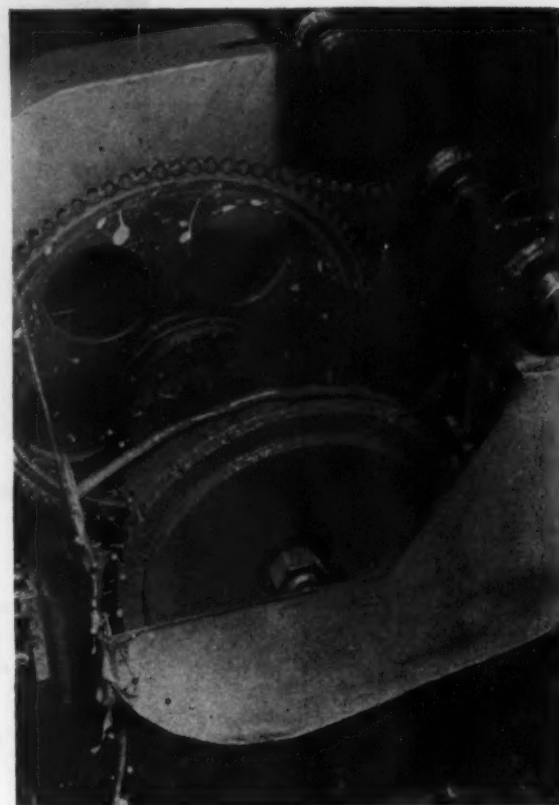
High-speed photograph of abrasion testing machine in action with an abrasive slurry.
